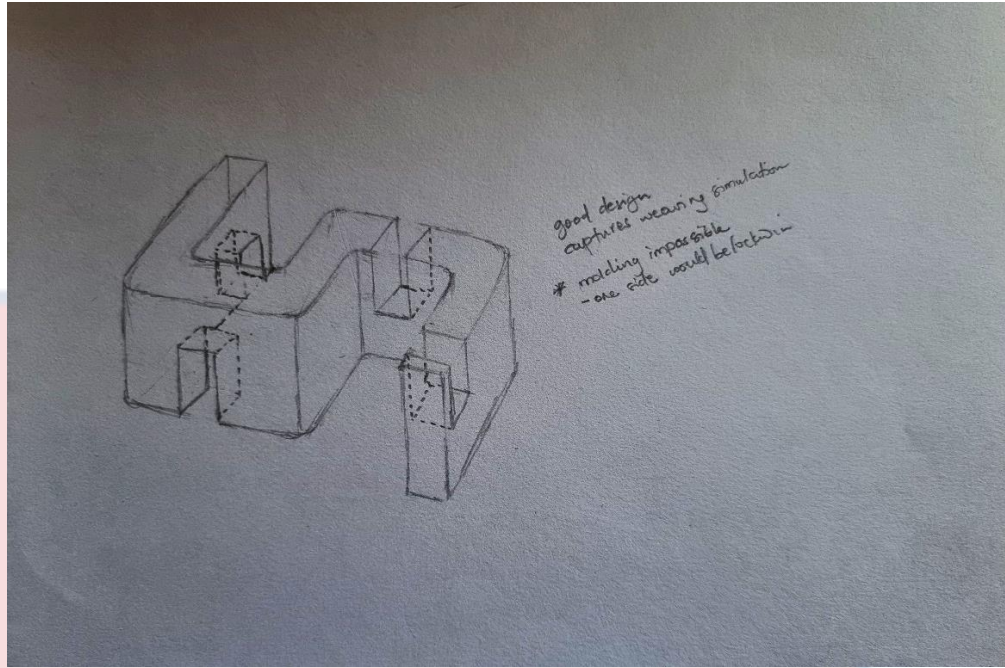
The mould design has taken shape, however, casting a complete 'S' as depicted in this proposed mould implies that one side of the 'S' cast will not disengage. Sketches by Mawukplorm H. Adjahoe, waste designing (2021)
